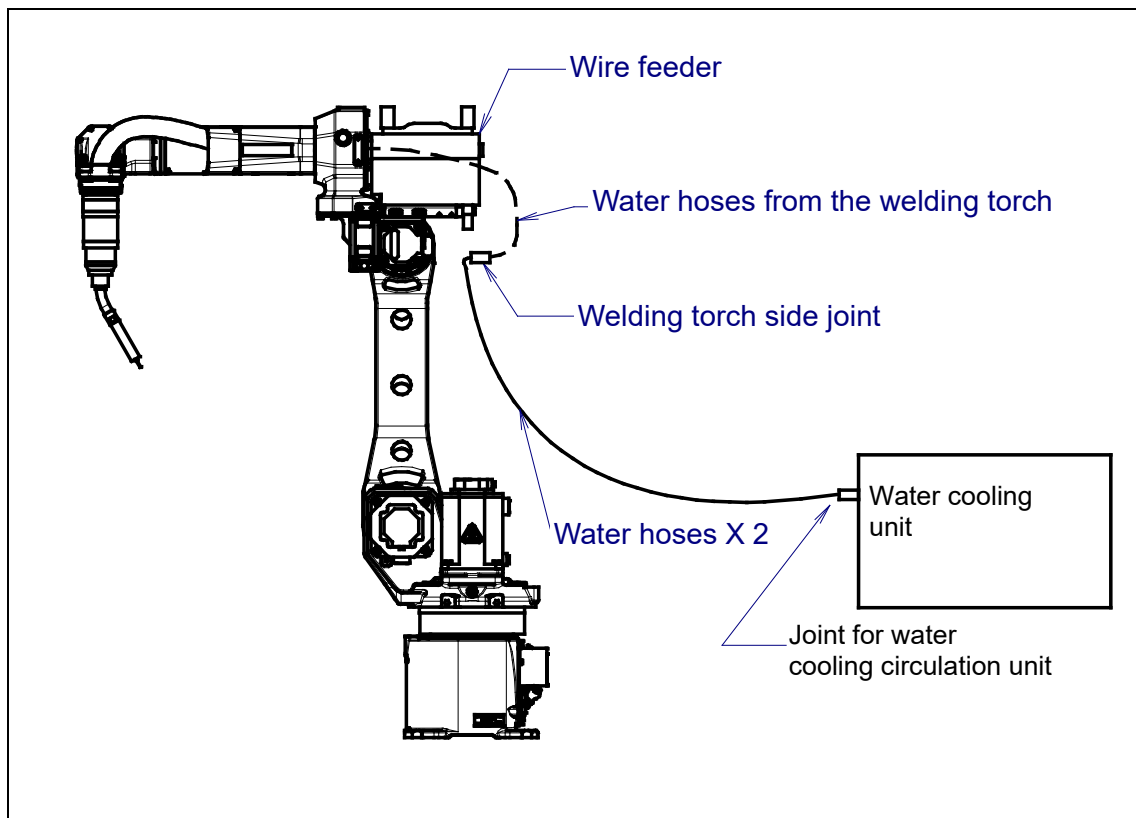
(e) Wiring of the Wire Feeder AutoDrive 4R220 (2/2)
